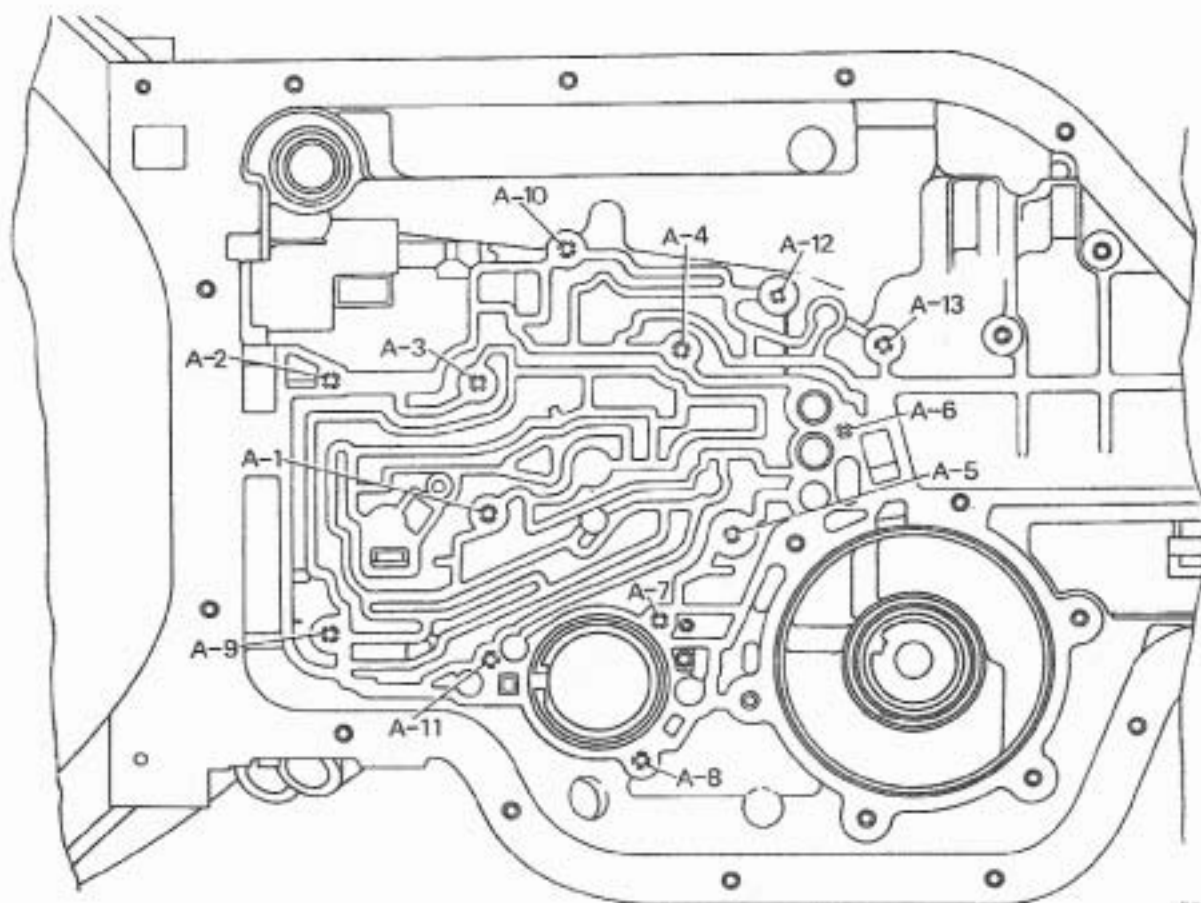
HELI-COIL IDENTIFICATION—VIEW OF UNDERSIDE OF TRANSMISSION CASE
